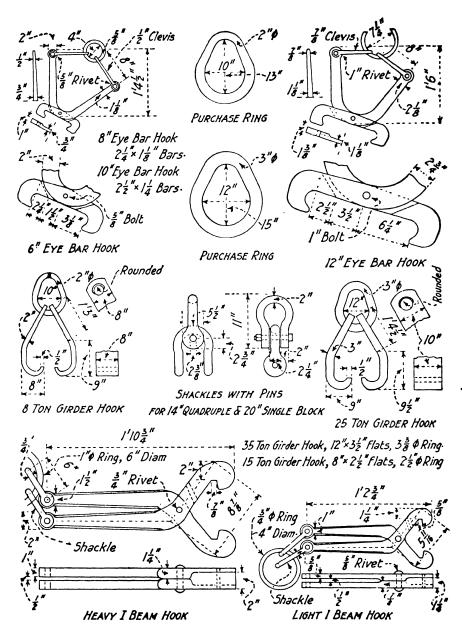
TOOLS FOR STEEL ERECTION. AMERICAN BRIDGE COMPANY.
